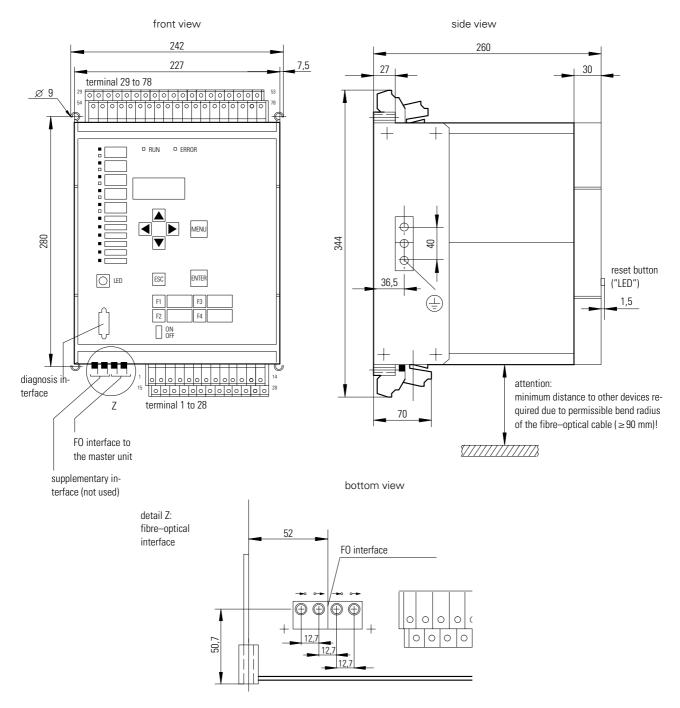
Mechanical dimensions 7XP2040–1 for surface mounting (all dimensions in mm)
